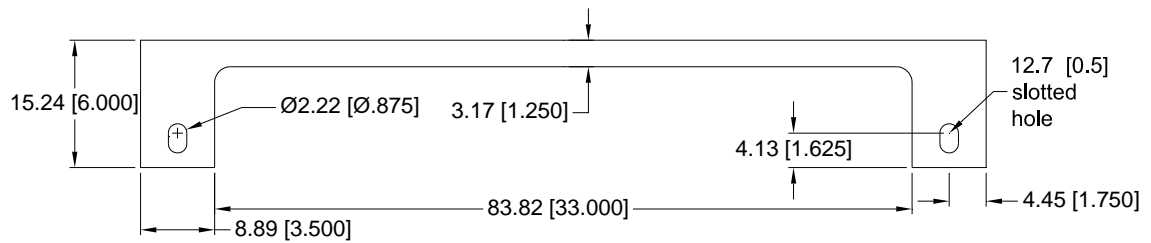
C-shape dimensions for *Test C*, $t = 12.7$ mm (0.5 in.). Units in mm [in.].
